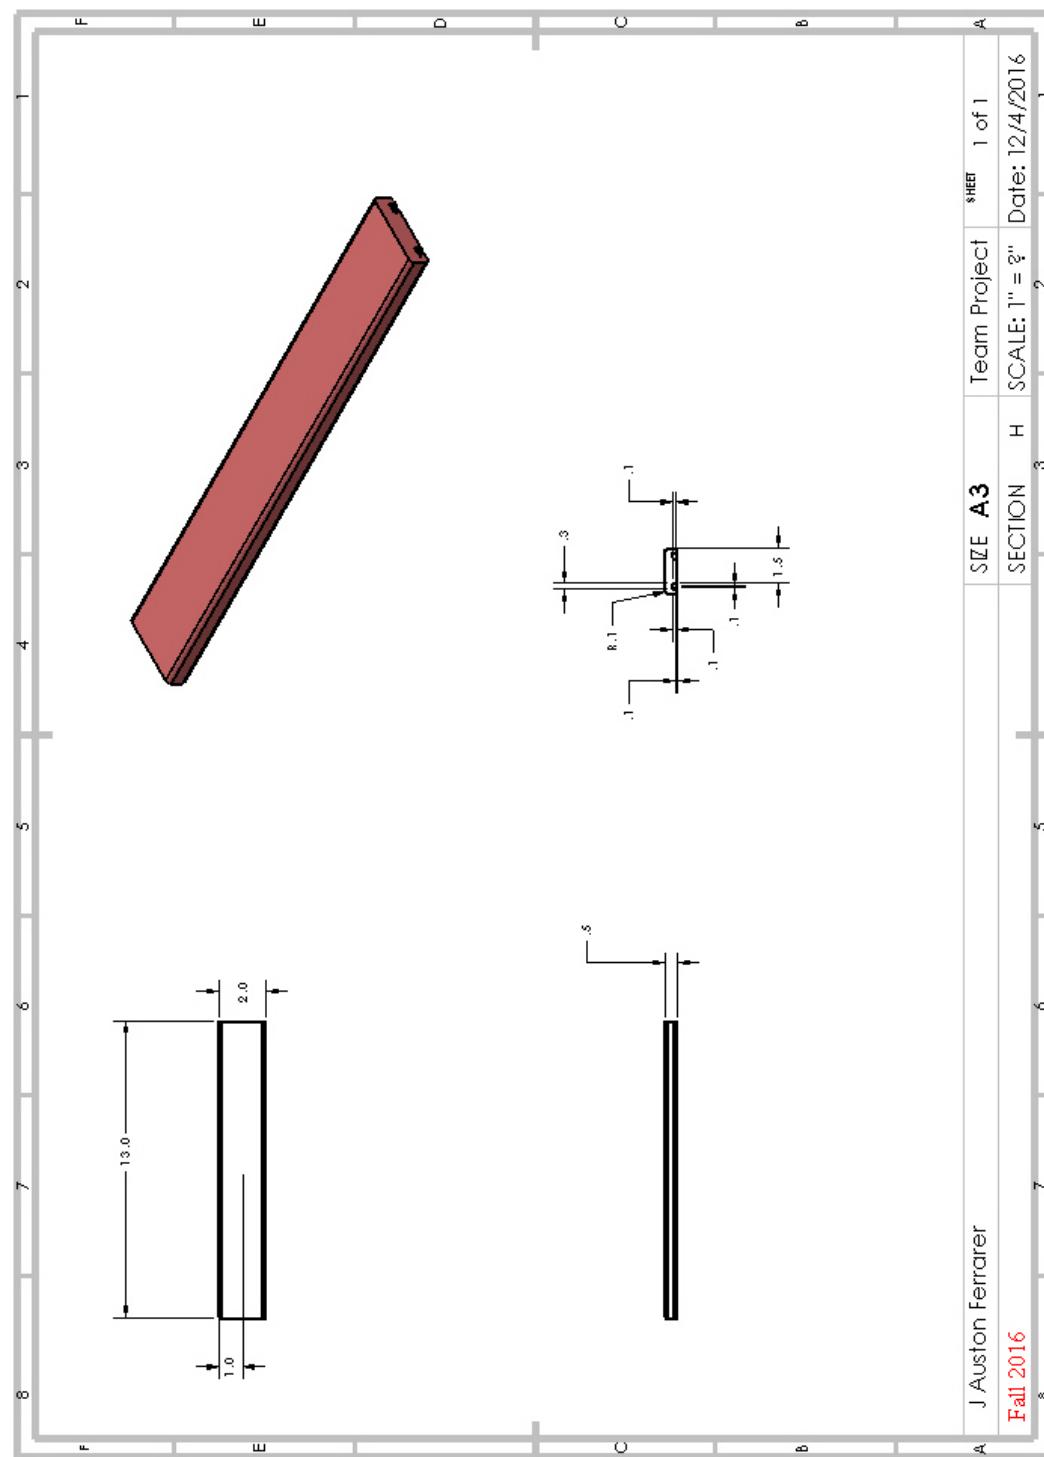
Ferrarer, Auston: Sidebar for Nozel
